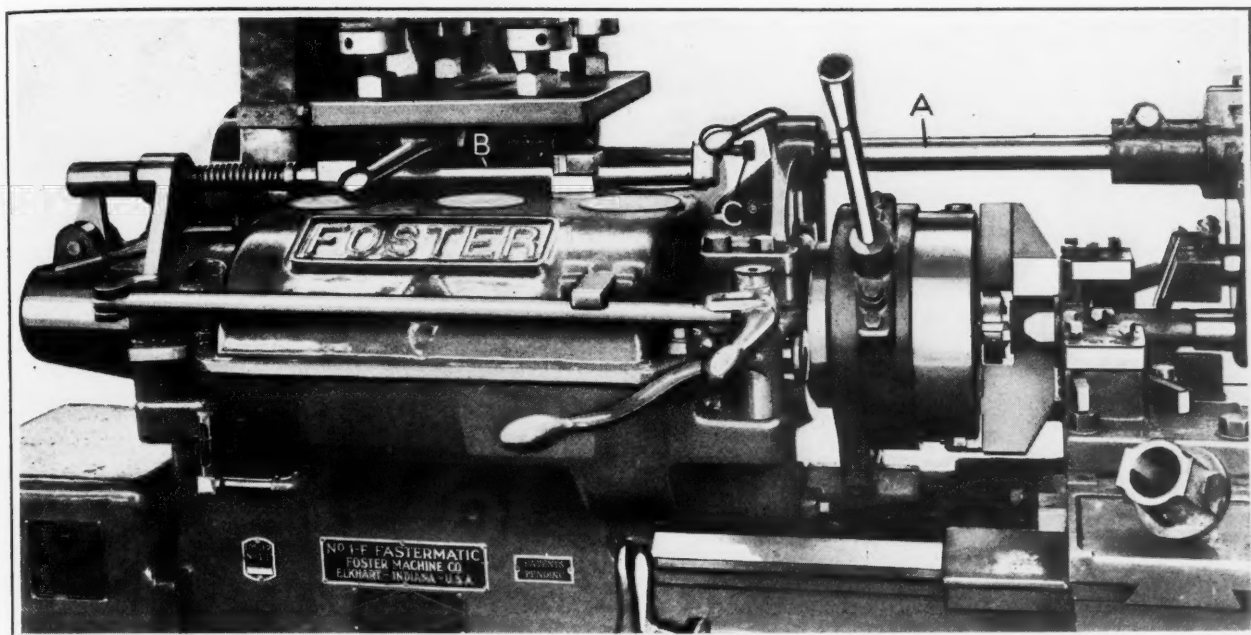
Lathe Set-up Showing how Back-facing Attachment is Used
